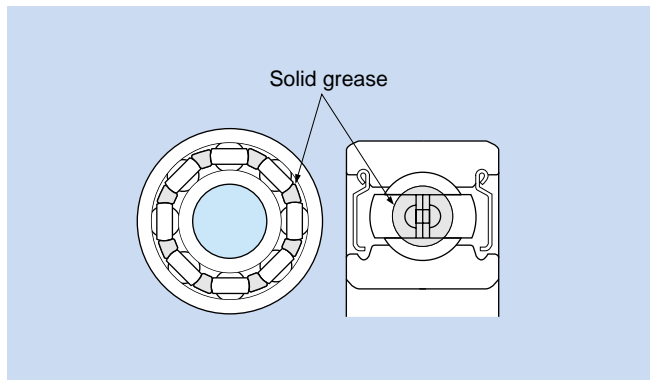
Deep groove ball bearing with spot-pack solid grease (Z shield) (Standard for deep groove ball bearings)
